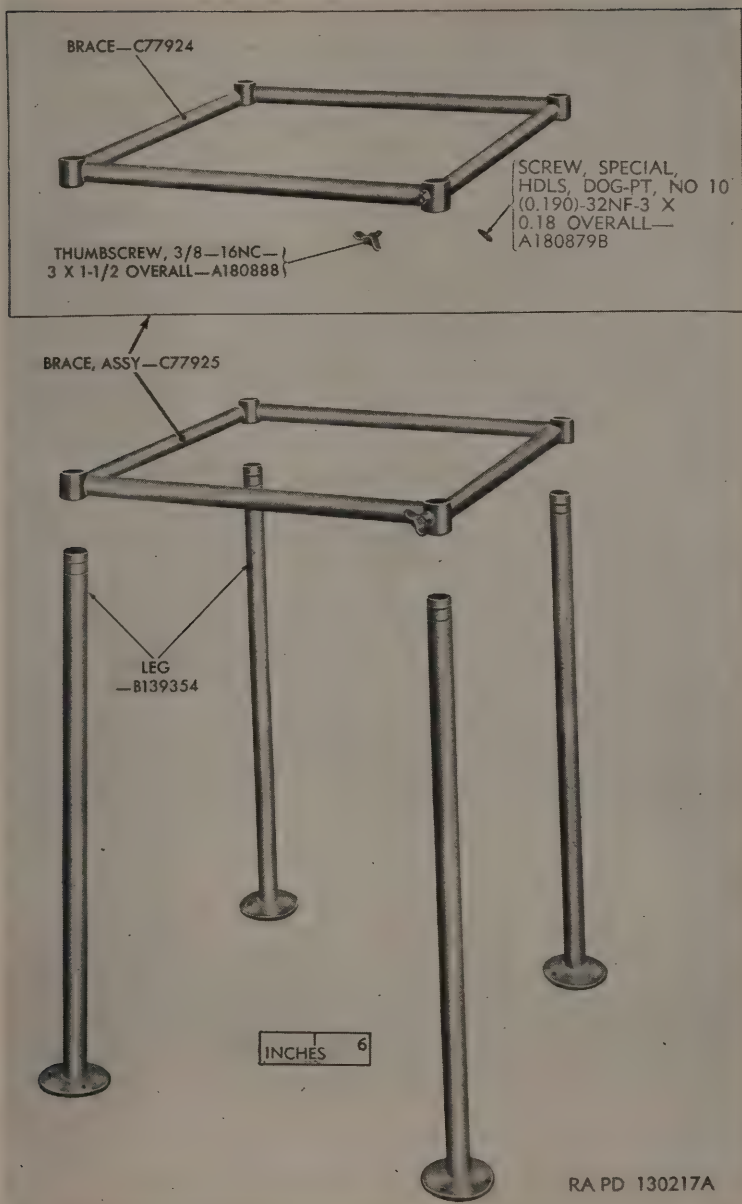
Brace assembly removed from the legs—plotting board M5 or M5A2.
